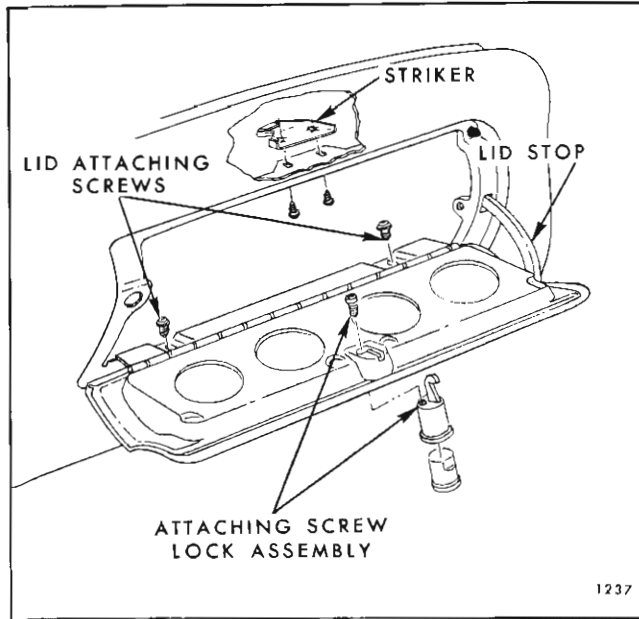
C15—Instrument Panel Compartment Door Assembly - 13000 Series
